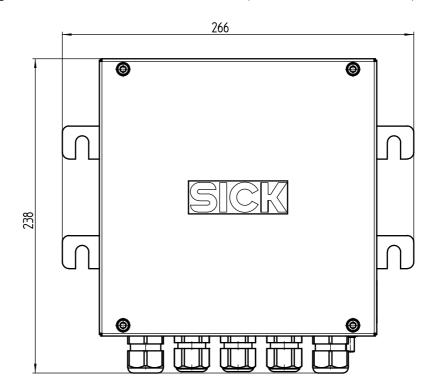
VISIC100SF drilling plan (all units of measurement in mm)
